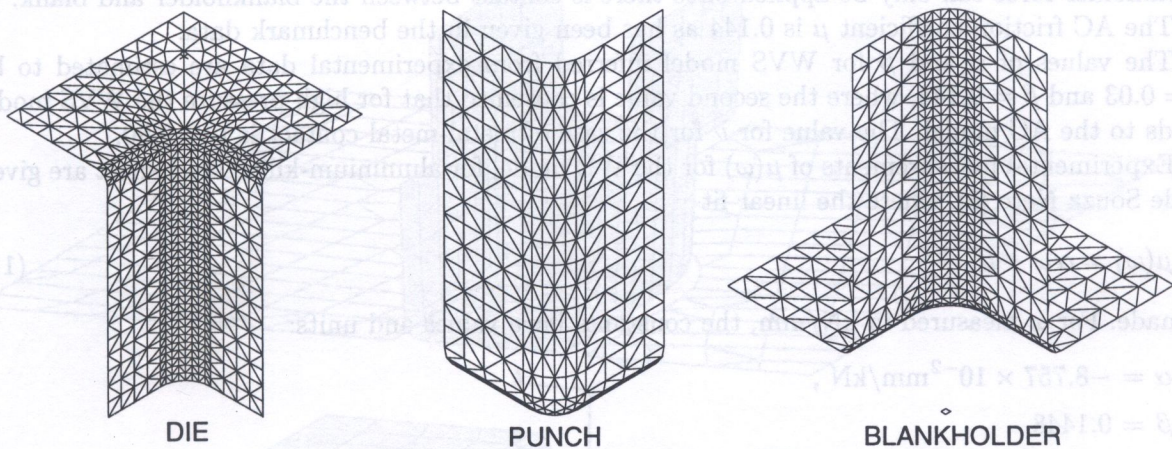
The die, punch, and blankholder used in the deep-drawing simulation (only one-quarter shown)
